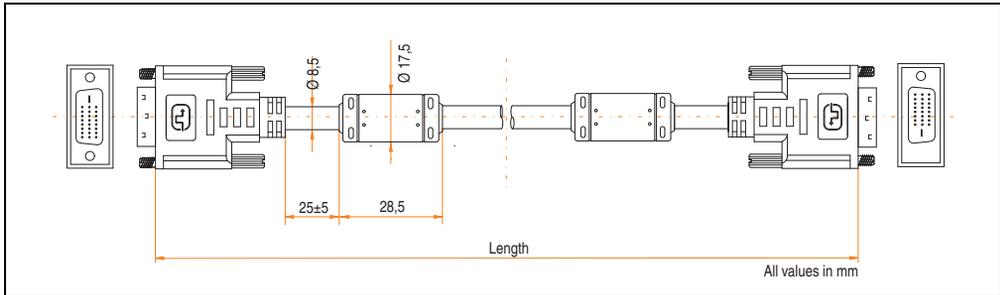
Dimensions - DVI cable 5CADVI.0xxx-00
